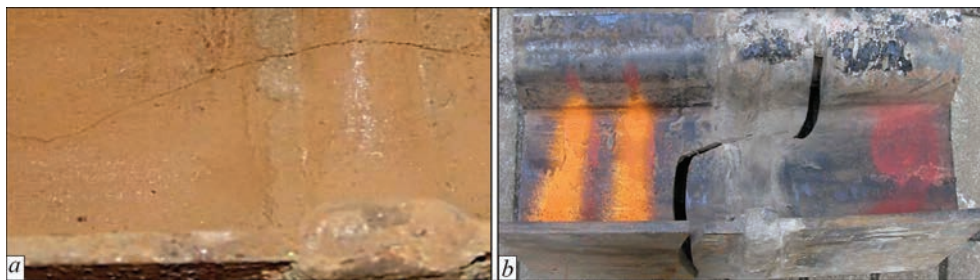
Initial crack (*a*) and nature of fracture of tram rails in the zone of welded butt joint (*b*)
